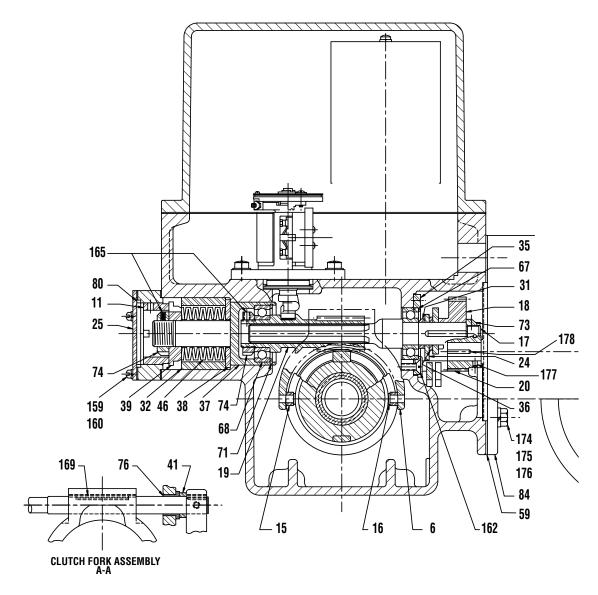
SMB-00 Parts Diagram – Motor End View
